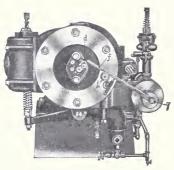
Hammer-Break Igniter Gear of Root and Van Dervoort Engine.
